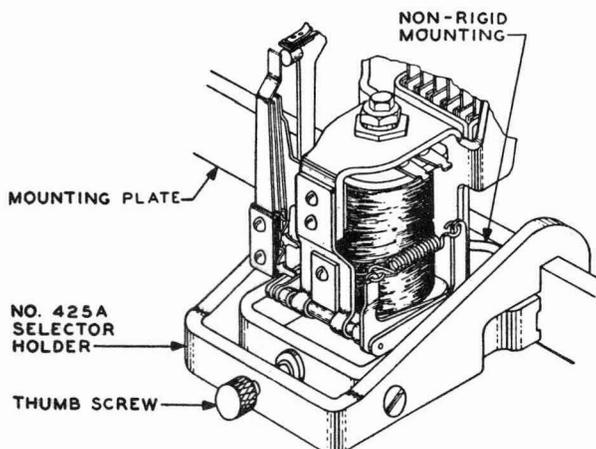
No. 425A Selector Holder in Place on Nonrigidly Mounted Selector on Flat-type Mounting Plate
